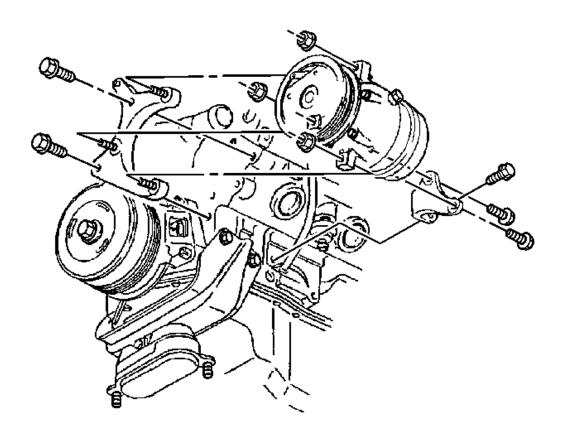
View Of A/C Compressor Courtesy of GENERAL MOTORS CORP.
